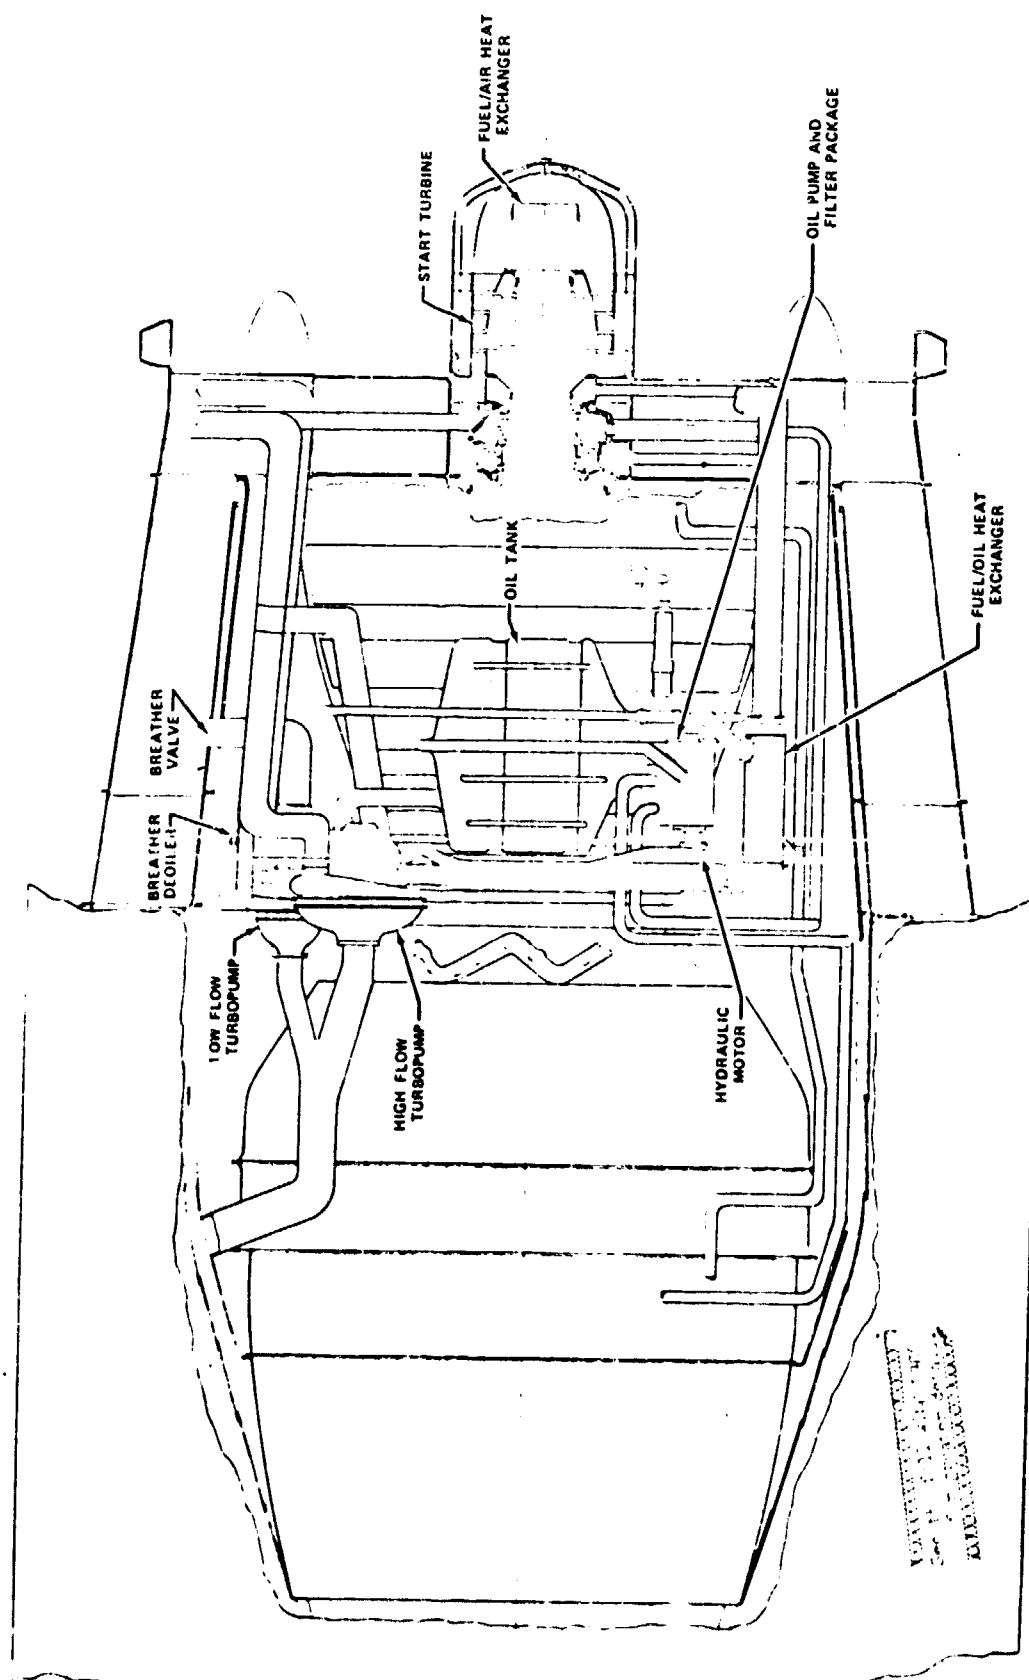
STRJ334B Fuel and Lubrication System, Right-Hand Side
